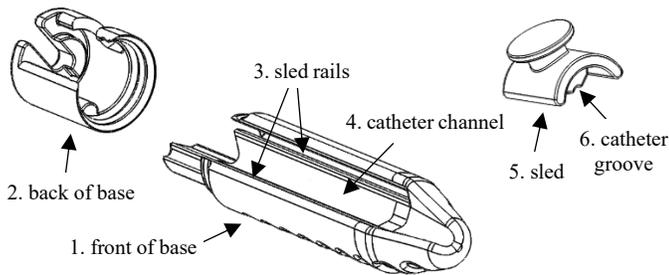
CAD drawing of a prototype catheter grip tool with key features identified.
